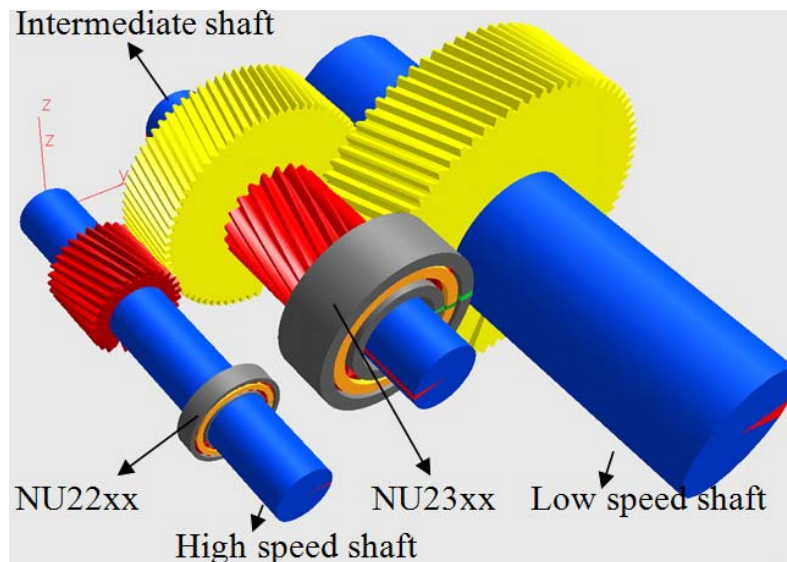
Simplified gearbox with two NU-cylindrical bearing in SIMPACK
